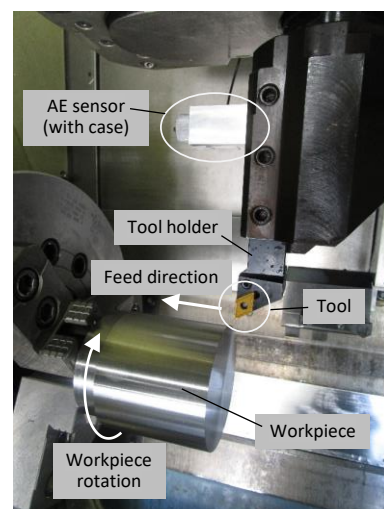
Setup of workpiece, cutting tool, tool holder, and AE sensor for outer diameter turning.
